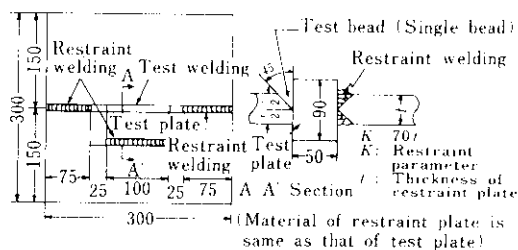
Shape and dimensions of window-type restraint stress relief cracking test specimen (B Type)
